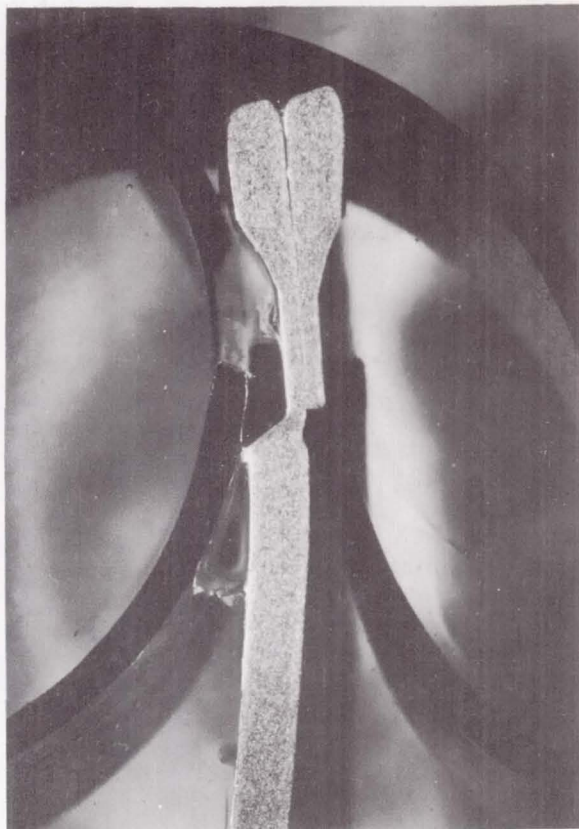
Typical Weld Resulting From Proper Die Positioning
